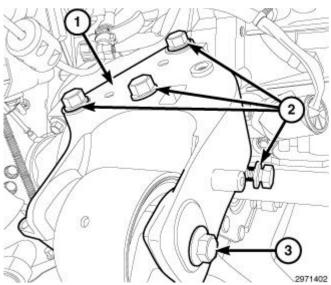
Rear Engine Mount Bracket & Bolts Courtesy of CHRYSLER GROUP, LLC
